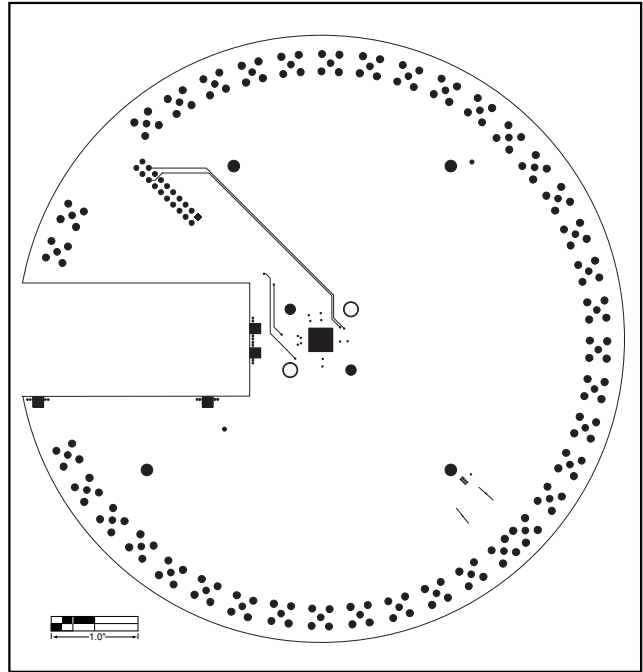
MAX3953 EV Kit PC Board Layout—Solder Side
